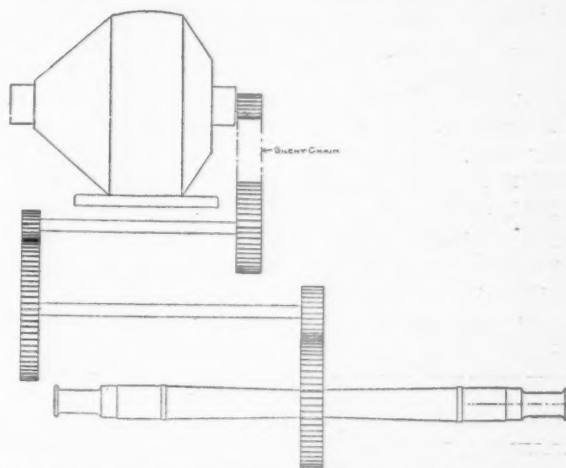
DIAGRAM SHOWING CHANGE IN THE DRIVING GEARING OF THE CAR-AXLE LATHE TO ACCOMMODATE MOTOR DRIVE.
